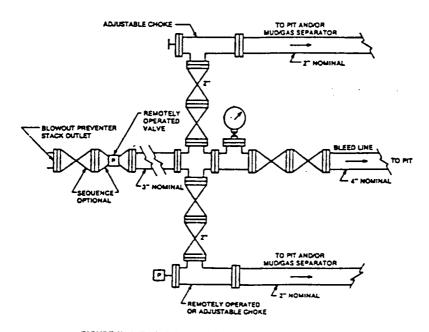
Typical choke manifold assembly for 5M rated working pressure service — surface installation.
